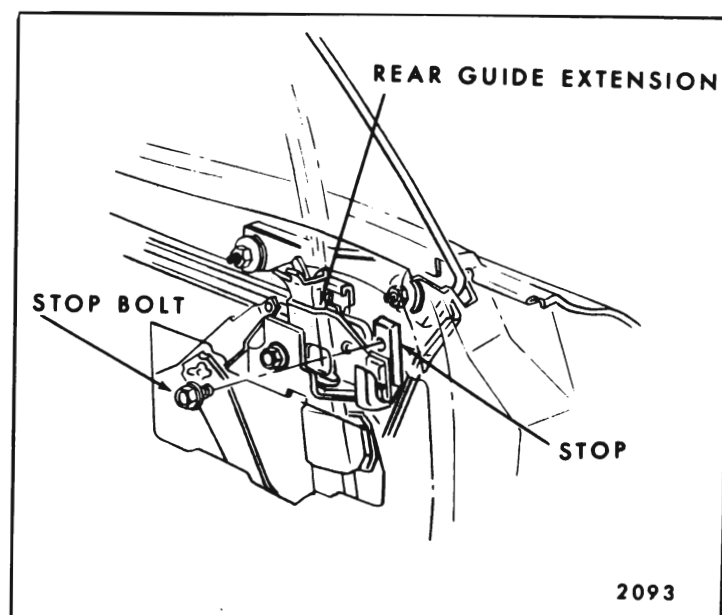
Window Rear Up-Stop - "A-39" Style
